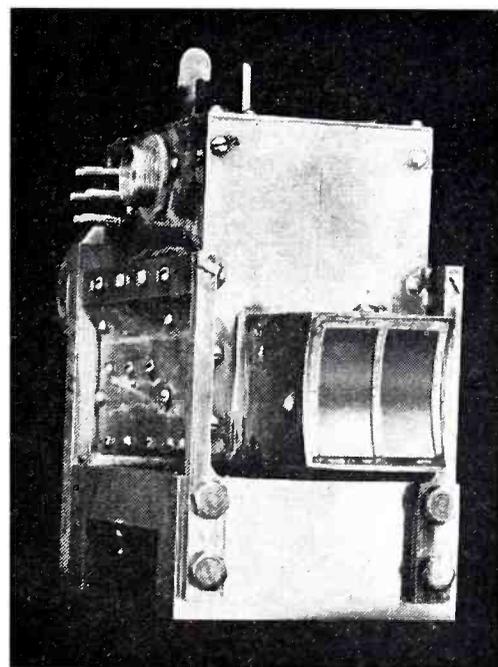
Detail of one of the two required spindle-testing probes, showing the curved capacitor plates, at the right. The assembly houses miniature oscillator and buffer tubes
